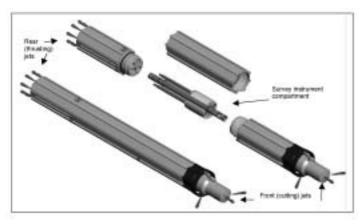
CMTE's water powered drilling tool assembled view (lower figure) and exploded view (upper figure).
